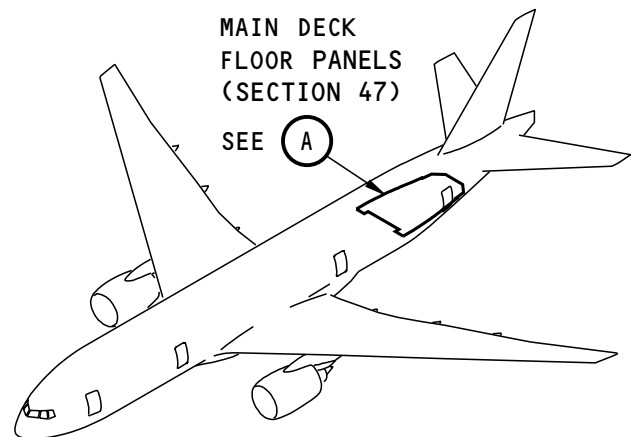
SUB-MAJOR ZONES 241/242 PASSENGER FLOOR PANELS
